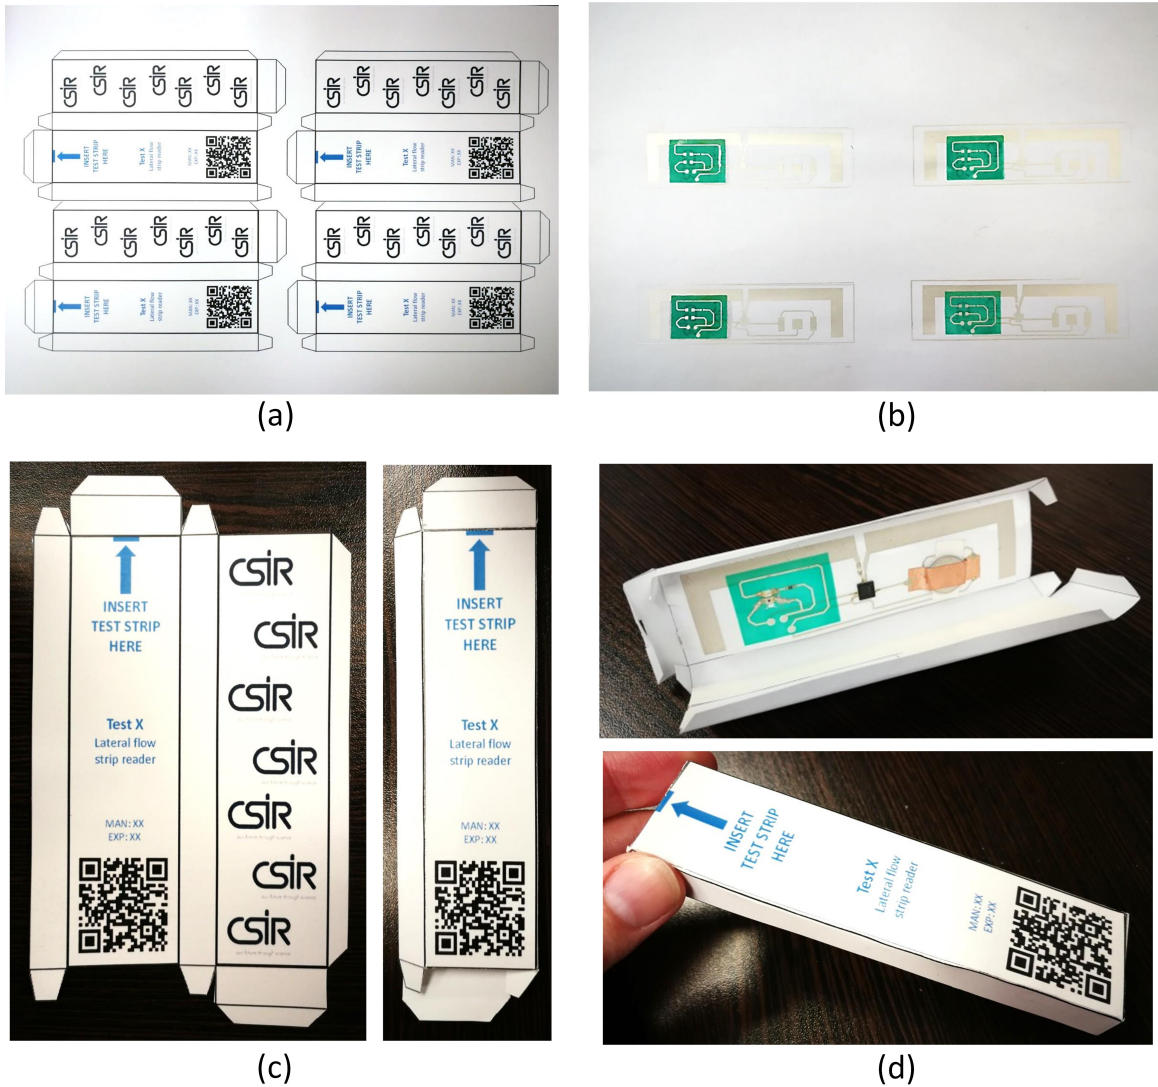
Initial prototypes for scalable, packaged reader devices, showing a) sheet-to-sheet printed graphics (outside of device), b) sheet-to-sheet printed electronics (inside of device), c) individual devices cut out, folded and glued, and d) assembled circuitry folded into final packaged device.
